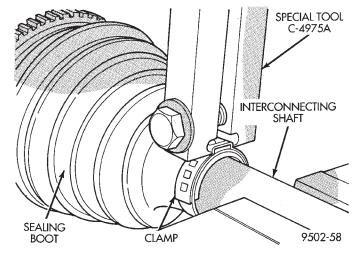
Crimping Tool Installed on Sealing Boot Clamp
